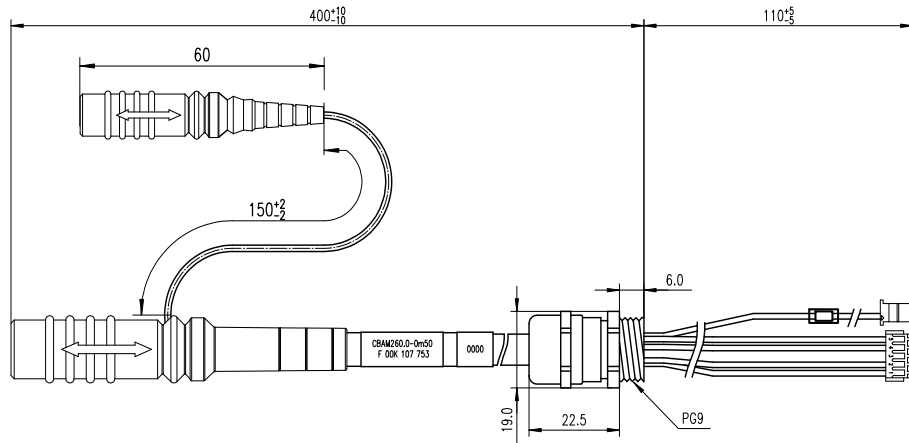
Combined Interface and Power Supply Cable CBAM260
